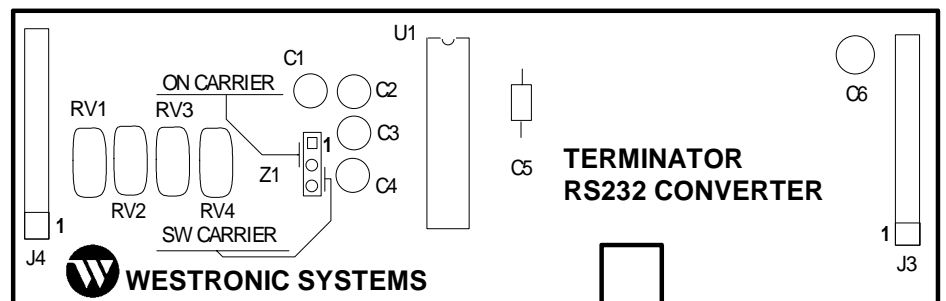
RS-232 Host Interface Board PN 535-T007 Layout
